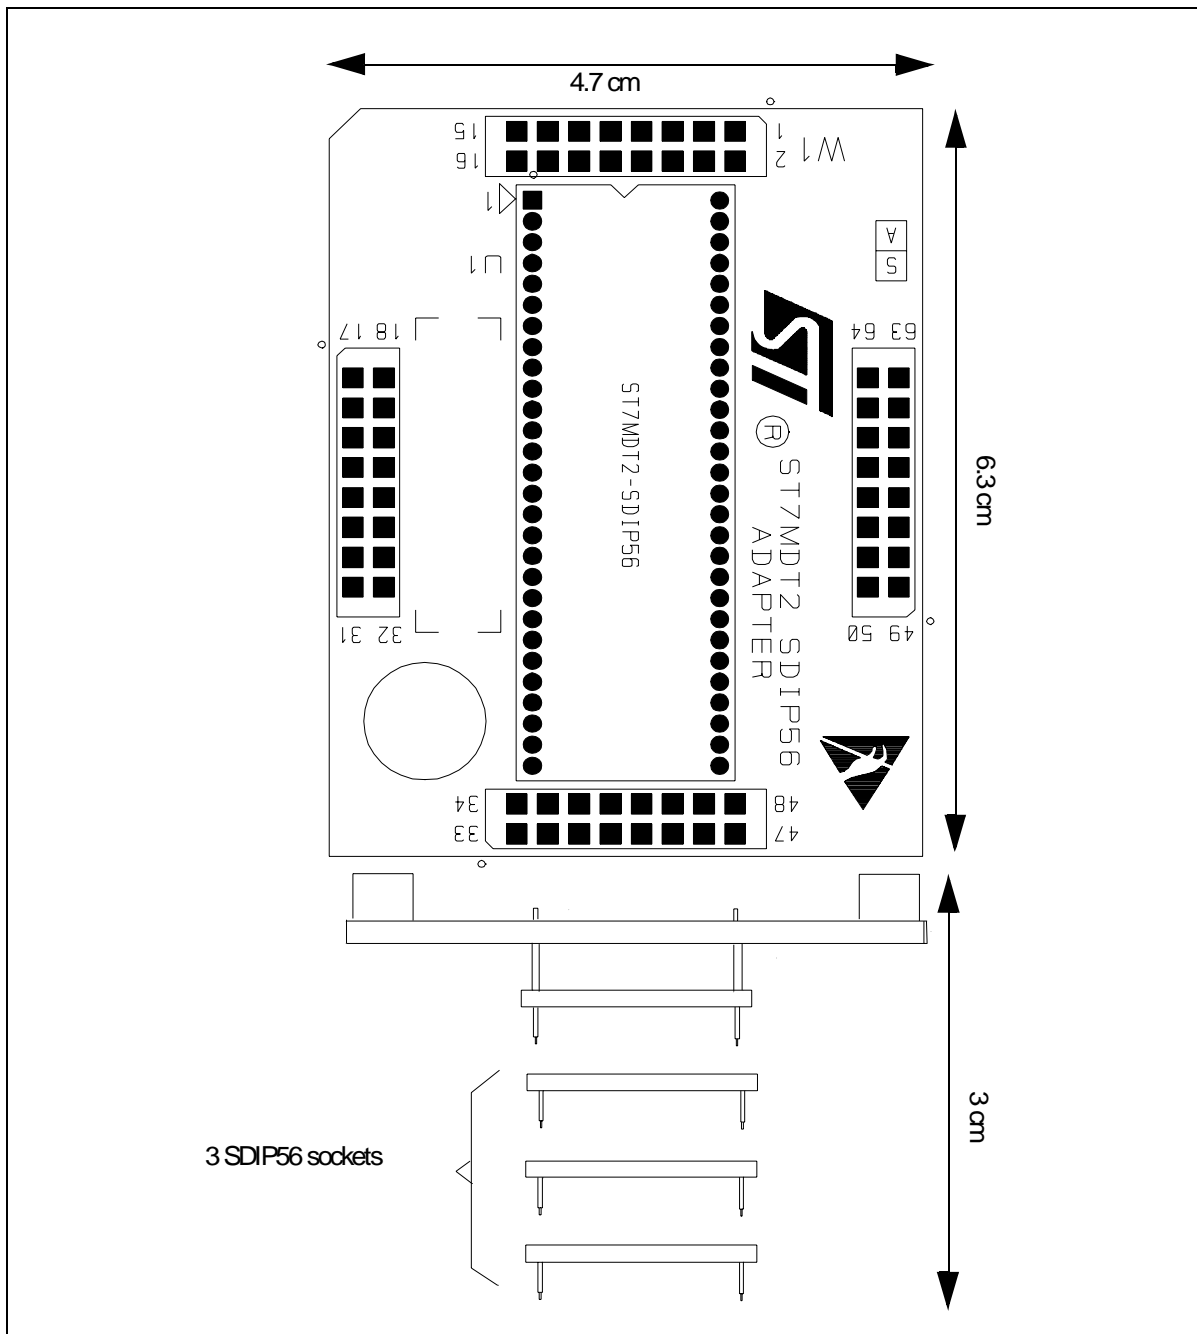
SDIP56 Pin Socket Device Adapter (ref.: DB408) Components Layout
